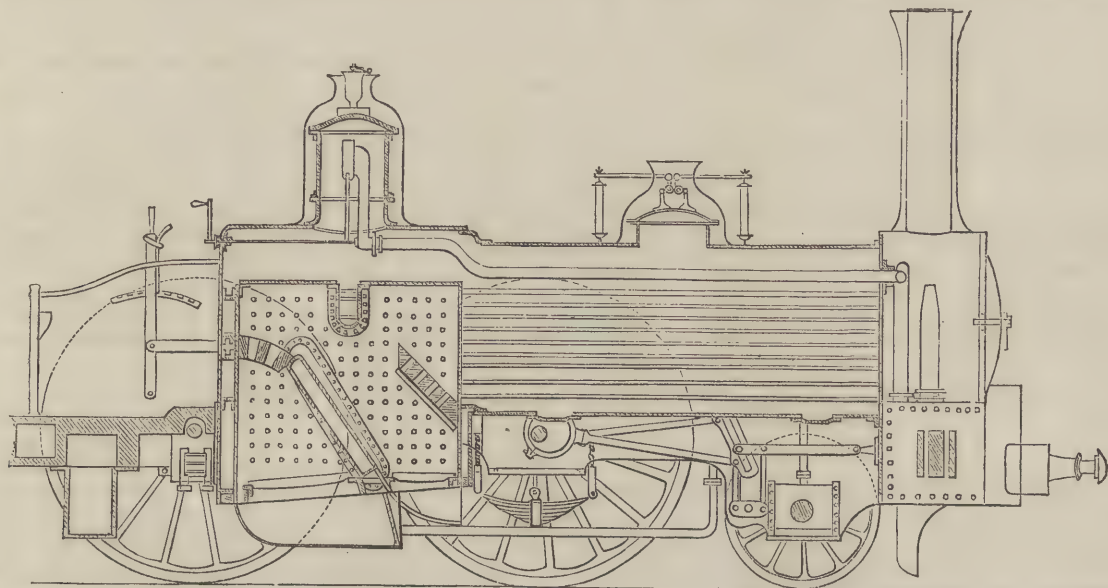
SECTION OF EXPRESS PASSENGER LOCOMOTIVE ENGINE.
